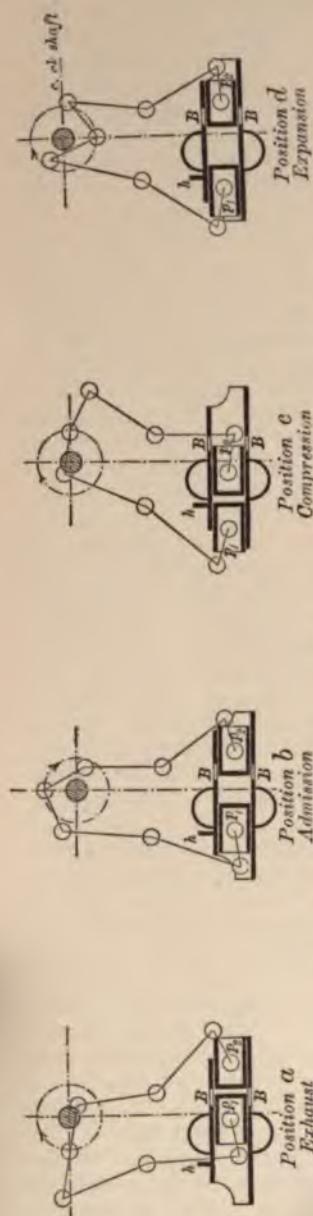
Atkinson Differential Engine—Piston and Links, Positions.
